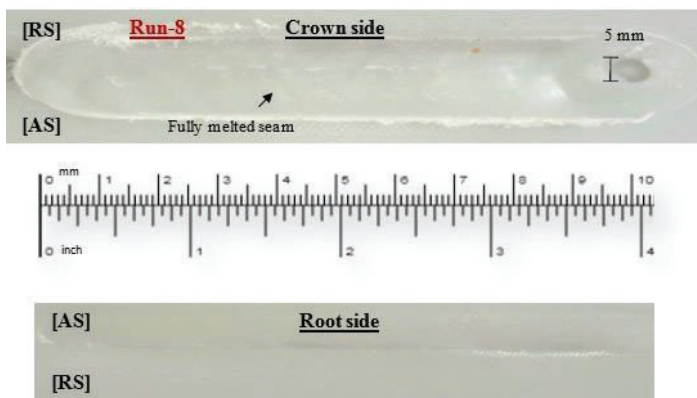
Joint-8 material flow, surface finish, and surface defects
